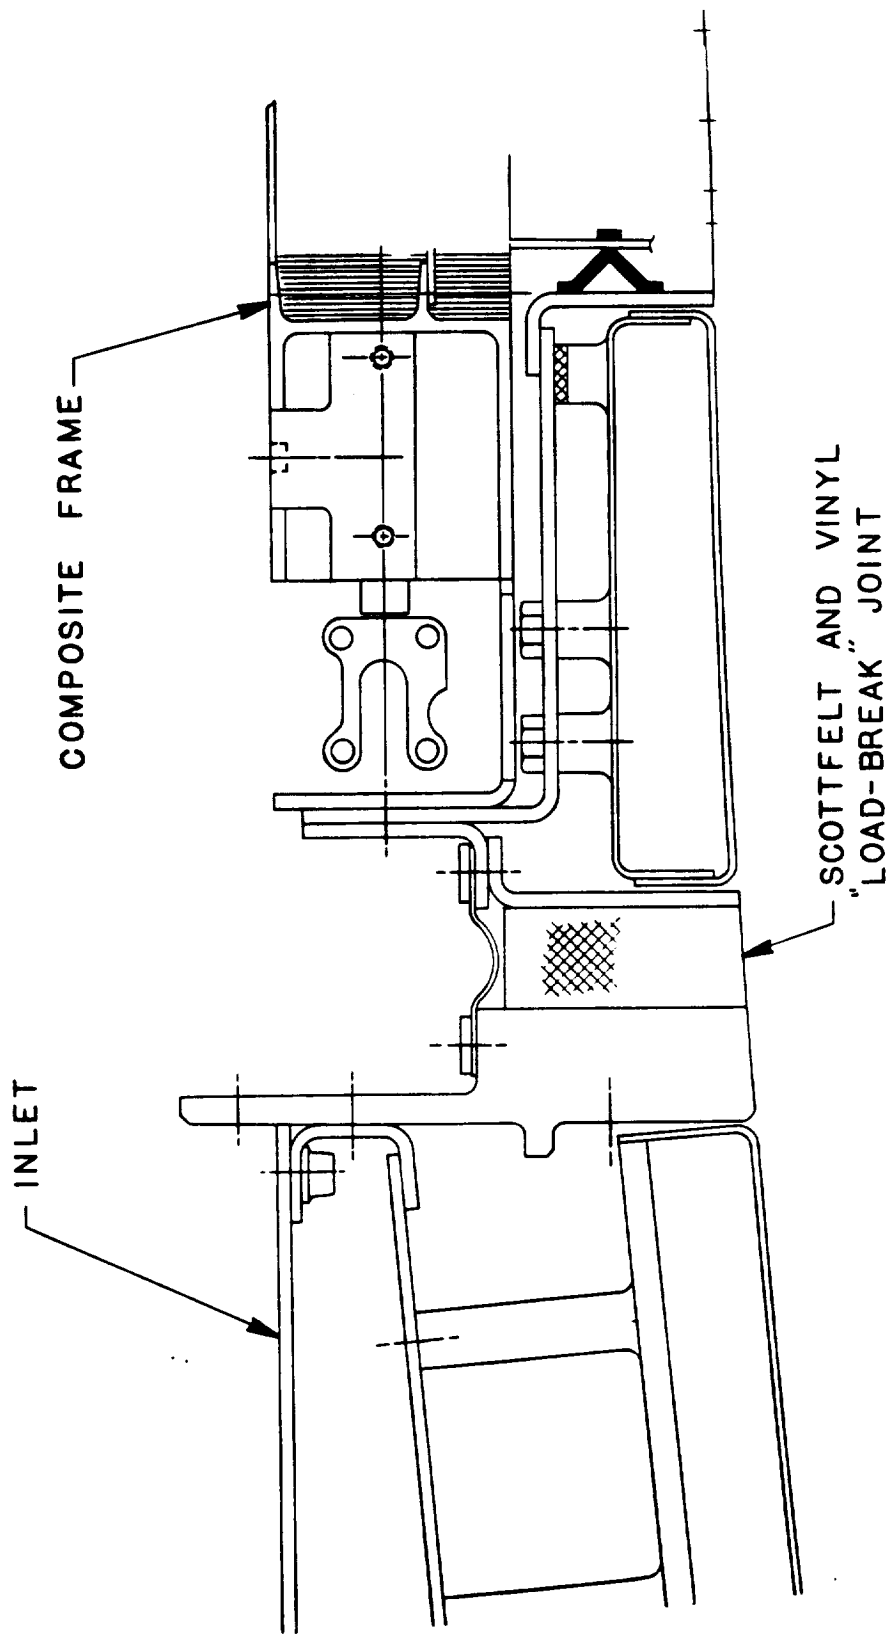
Typical Decoupled ("Load Break") Joint.
